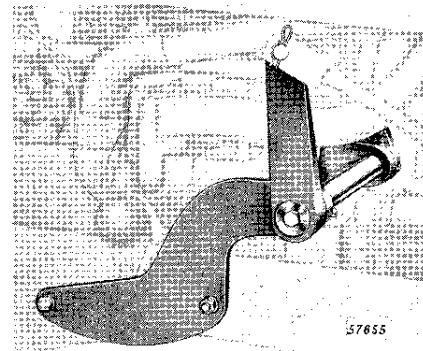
Right-Hand Side of "Solid" Front-Mounted Rockshaft Operated by One Remote Cylinder
